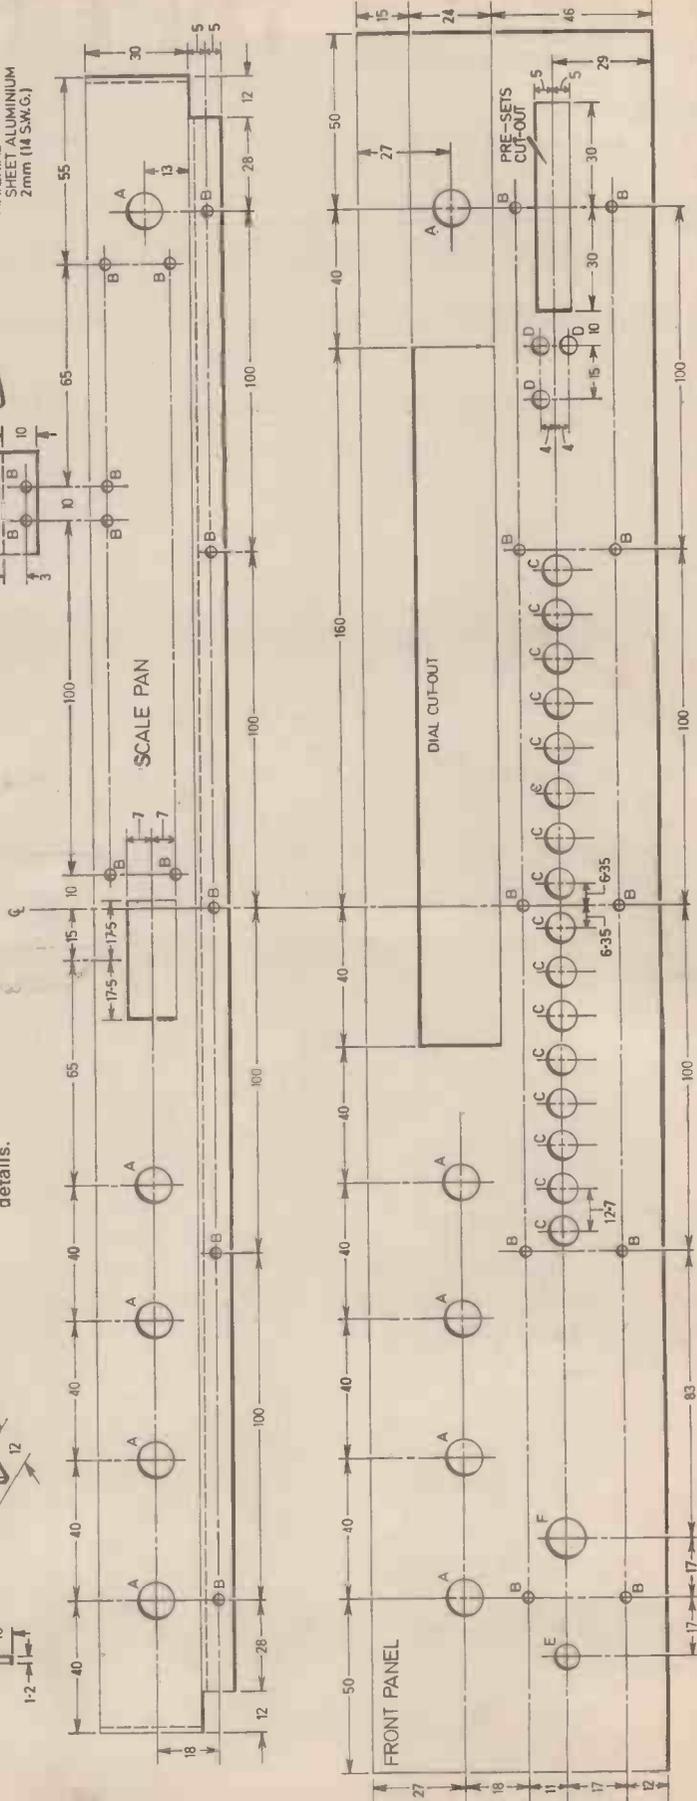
(bottom) Front panel: drilling and cut-out details.
